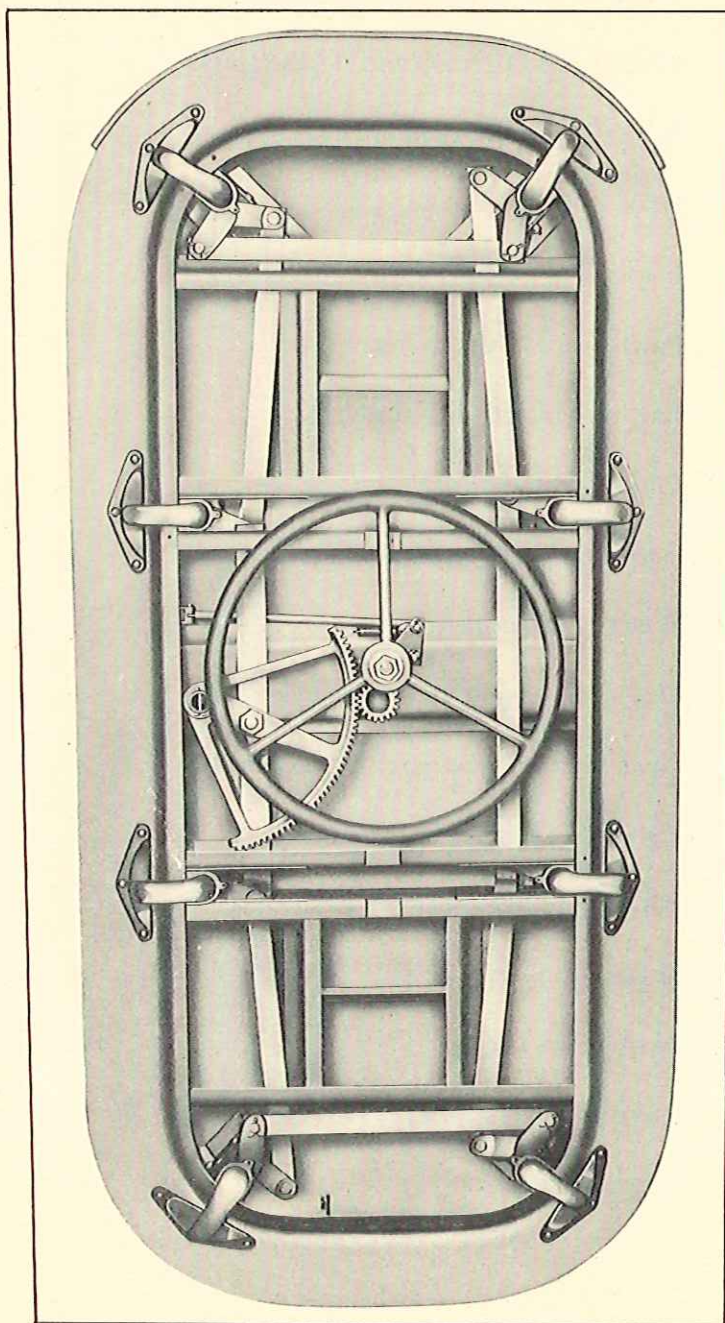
Inside view, TLD-2(crs) left-hand door, in secured position in frame.
